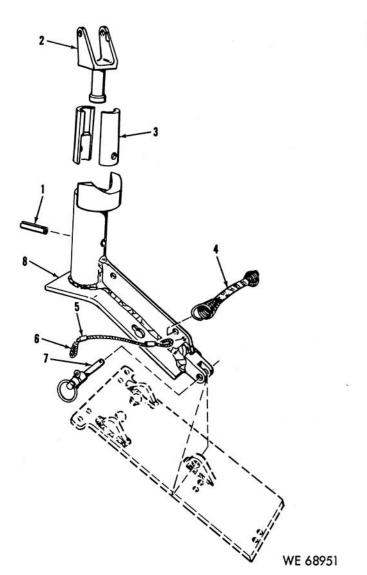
Rear Ramp Mount Assembly M41— Exploded View.
